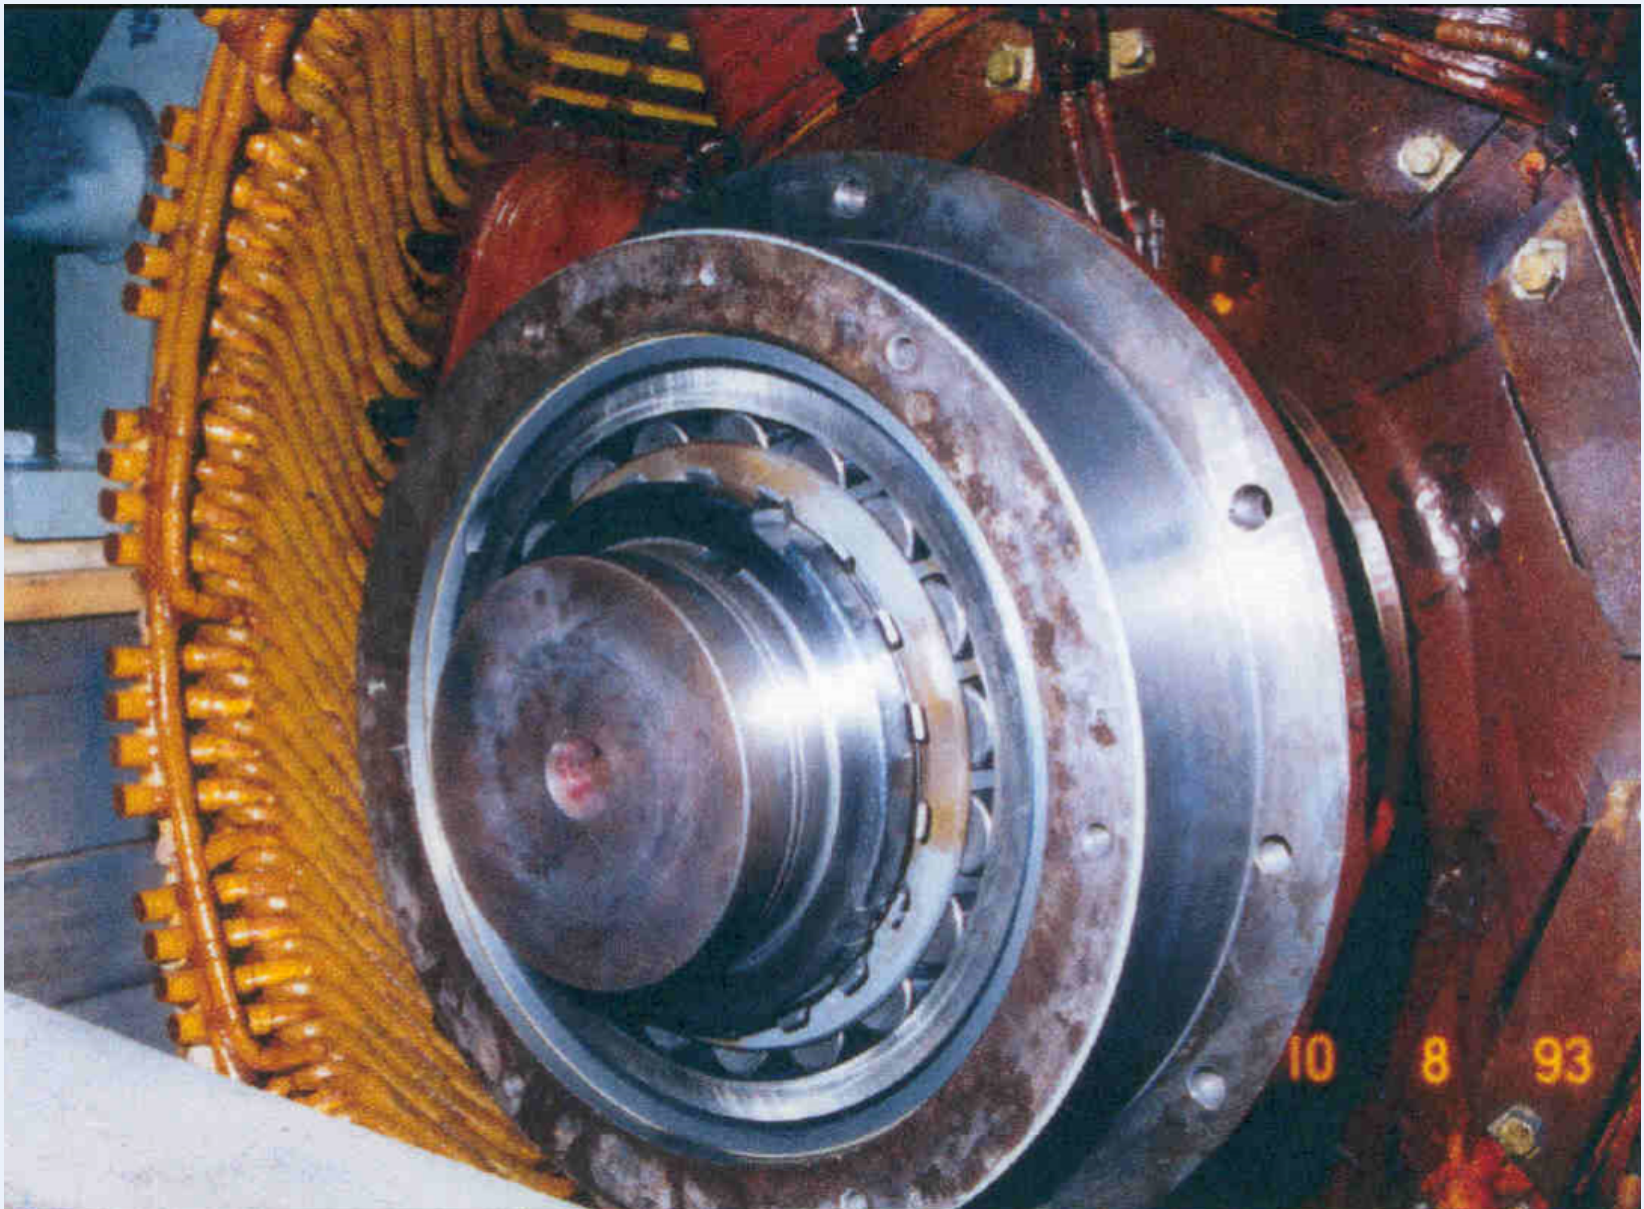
Bearing and Housing Assembled to Rotor Shaft
